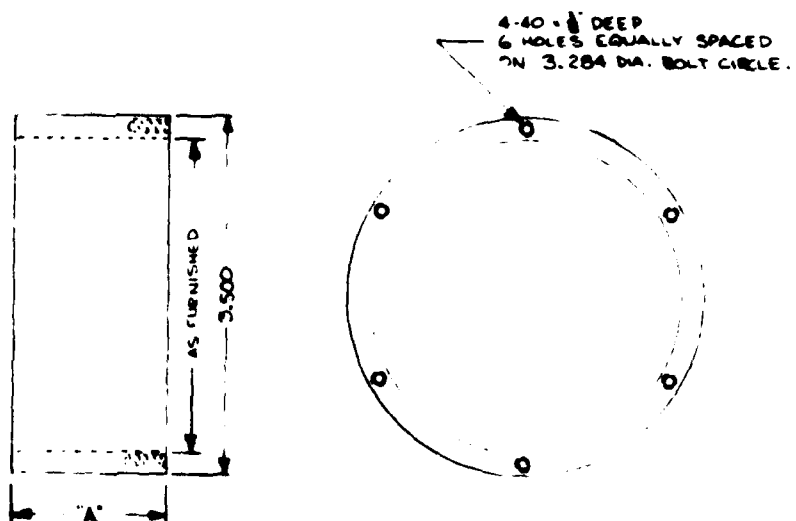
Part I in Fig. 3 the exhaust end plate. Dimensions in this and subsequent figures are in inches; dimensions in millimeters can be obtained by multiplying by 25.4
